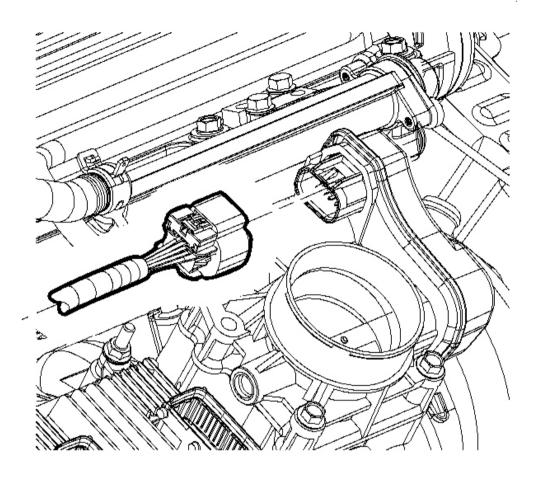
View Of Throttle Body Electrical Connector Courtesy of GENERAL MOTORS CORP.
